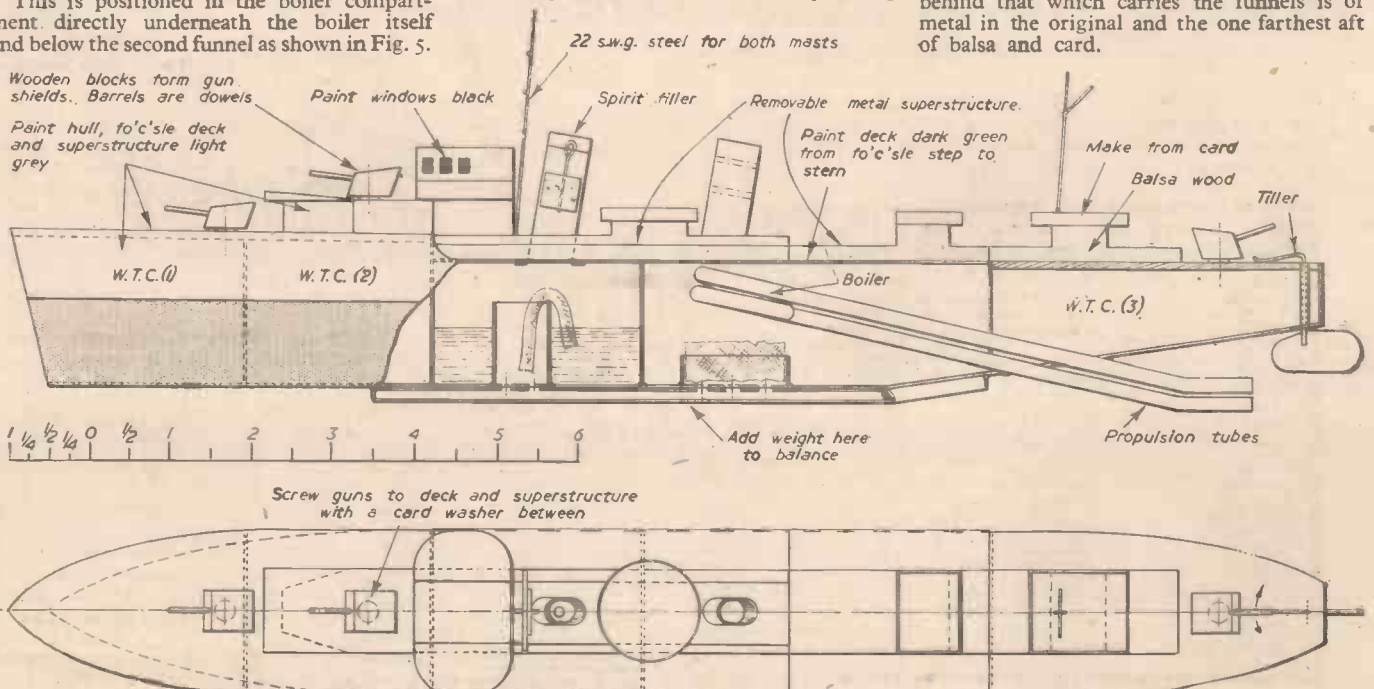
Side elevation and plan view of the boat, showing general arrangement.
